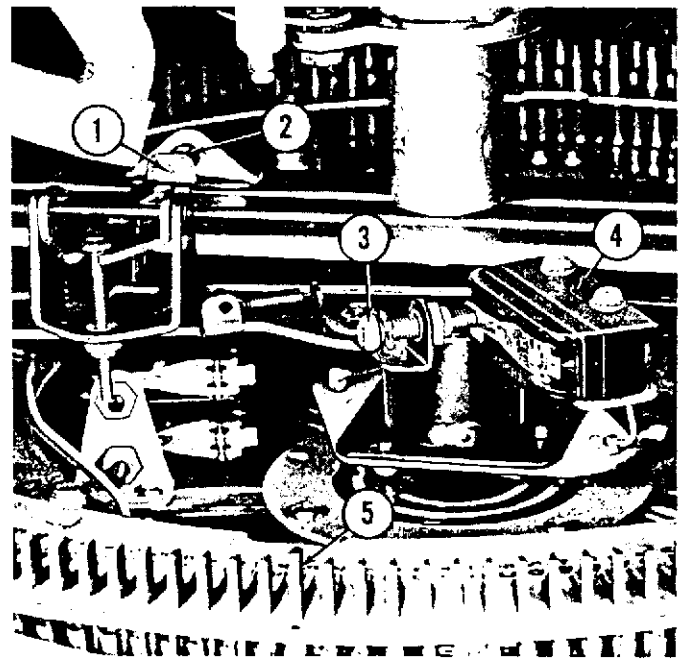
CARRIAGE SWITCH ADJUSTMENTS
